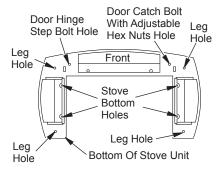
Locating Threaded Holes for Stove Bottom, Legs and Door Attachment (Appearance May Vary Depending on Model)
